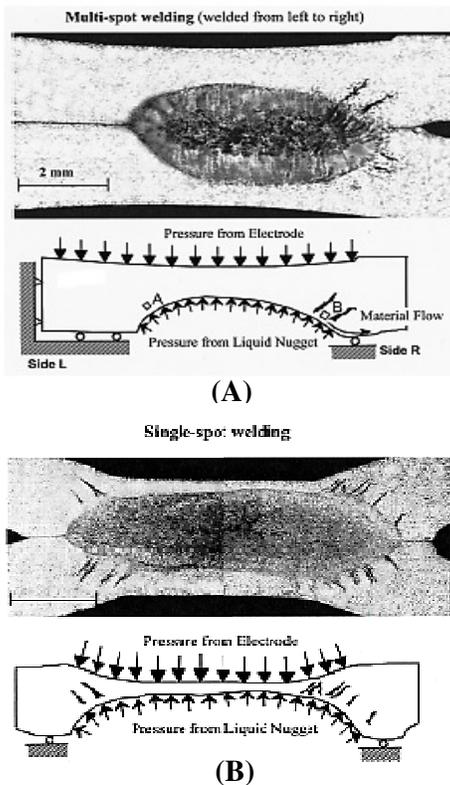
(A) Longitudinal cross-section of a multi-welded specimen. (B)
